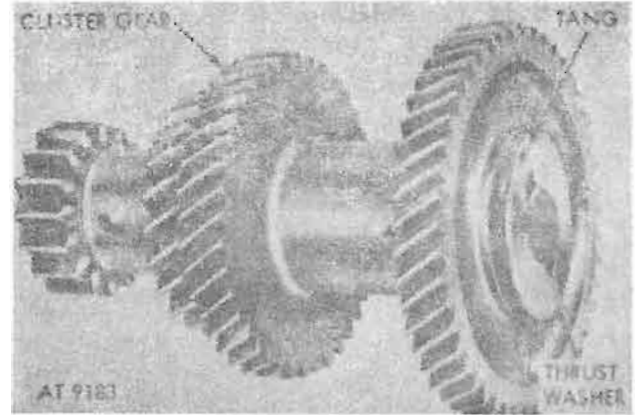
Cluster gear assembly—location of thrust washer tang.
